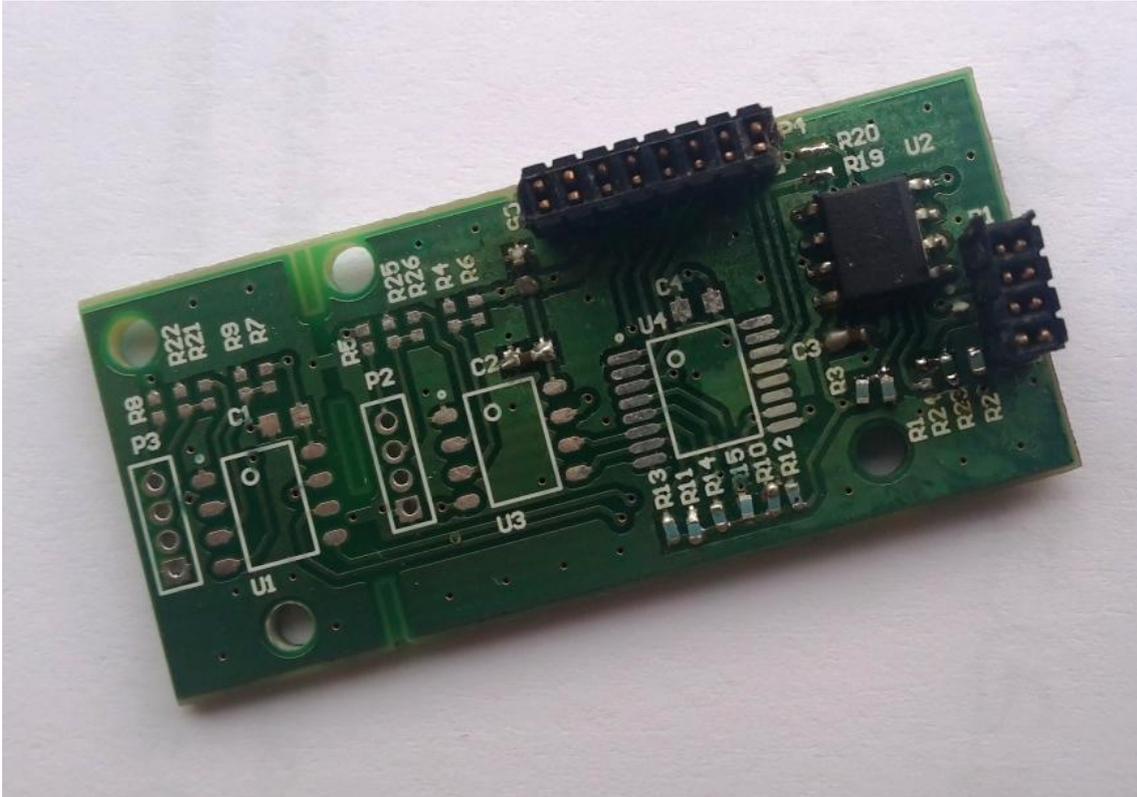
The Assembled Force Sensor Extension Module in Single Sensor Configuration
